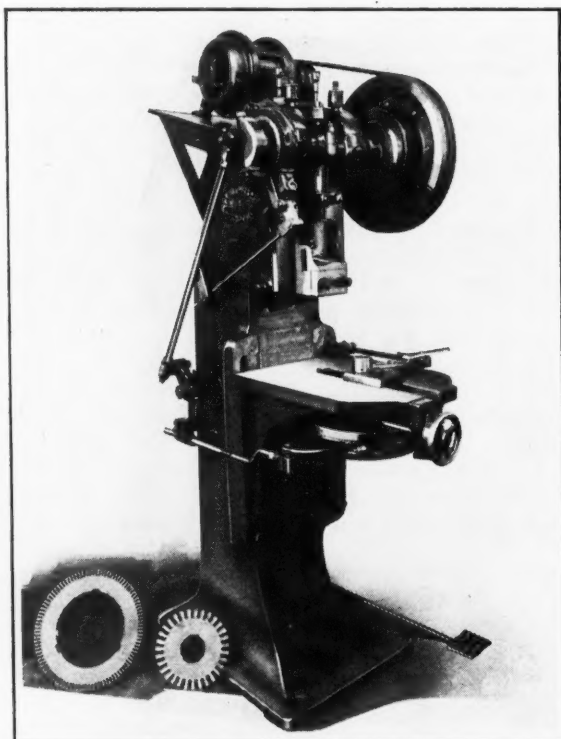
High-speed Notching Press Fitted with Rotor Notching Attachment
